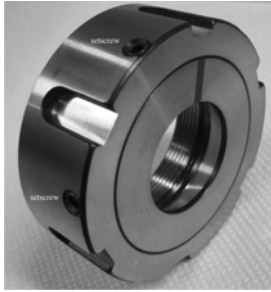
“GlockCNC Absolute-Zero-ER Nut” as they call it. It includes an inner ring hold by a retention ring. That ring’s position can be adjusted by six setscrews to compensate for a runout. Well, good design, but tedious: it has to
